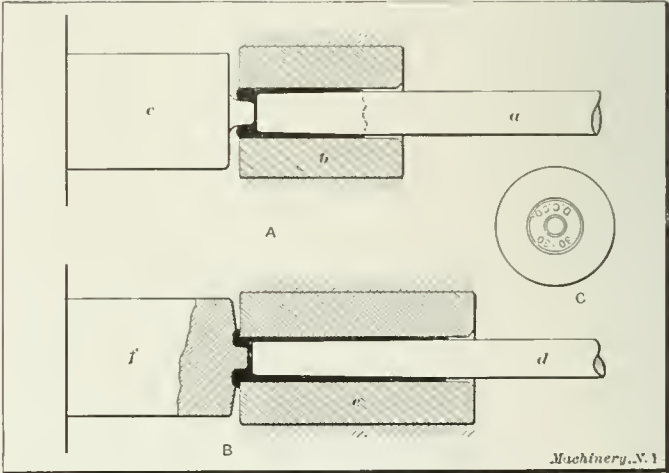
Illustration showing how the Cup is inserted and the Shell headed
